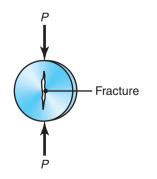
Disk test on a brittle material, showing the direction of loading and the fracture path.
